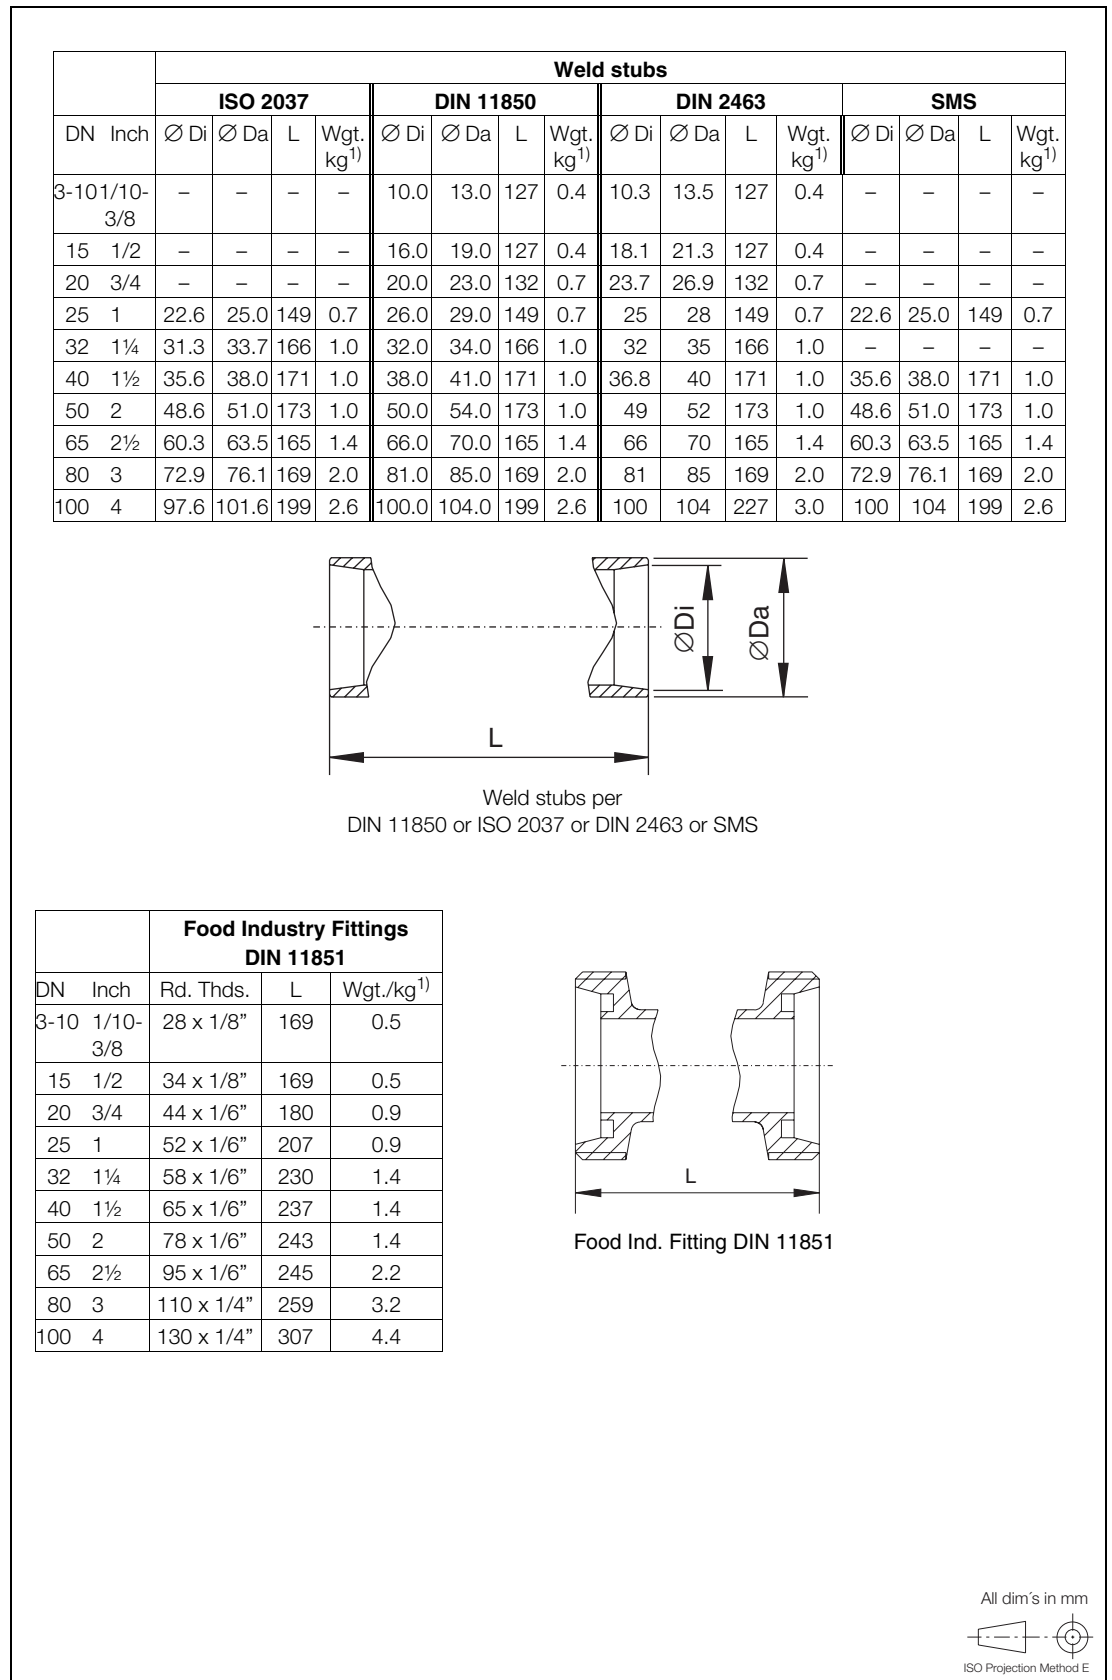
Dimension Drawing, DN 3-100, Adapters for Variable Process Connections
